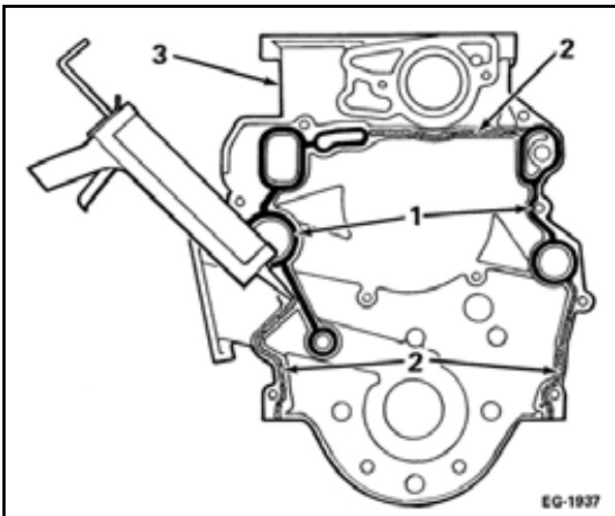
Installing the Gaskets and Applying RTV to the Front Cover
